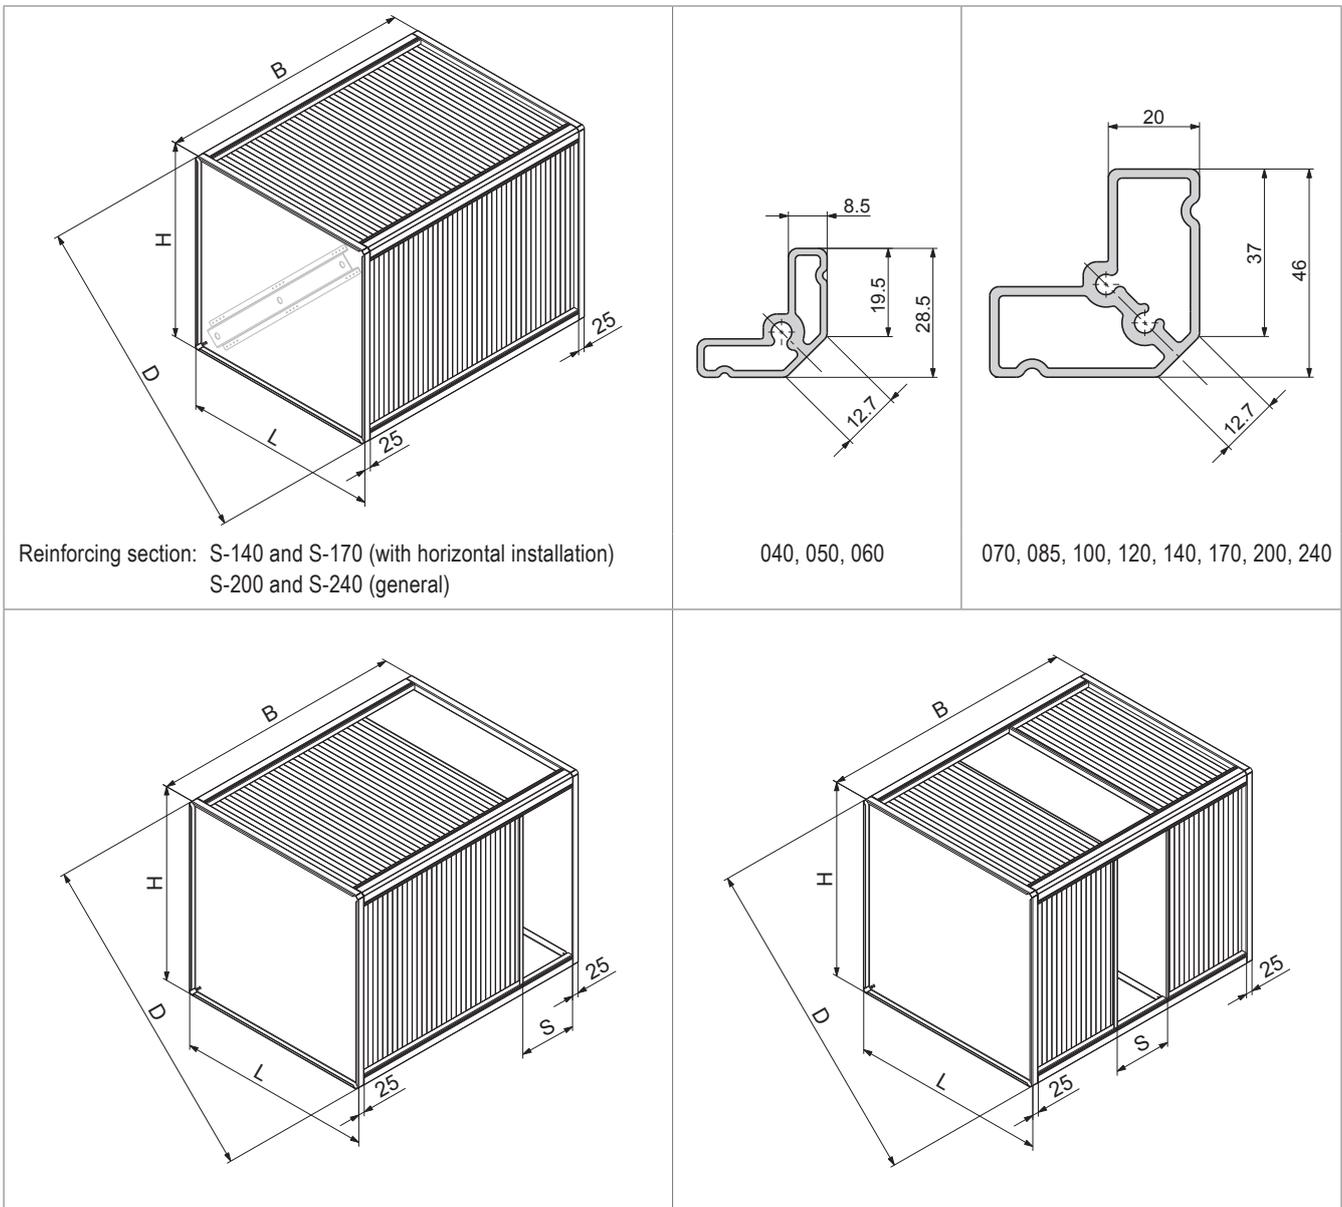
Dimension sheet for design S plate heat exchanger without dampers (dimensions in mm)
